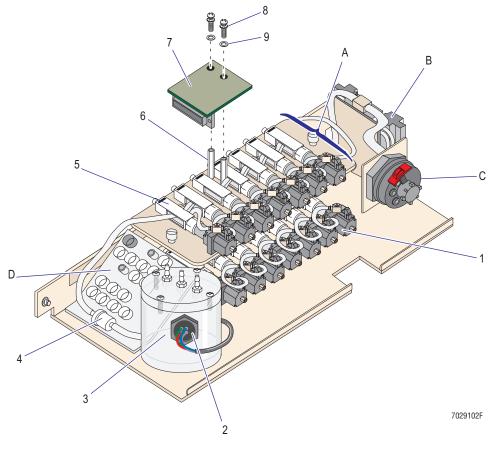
Lower Pneumatics Drawer (See Table 8.2-37)
